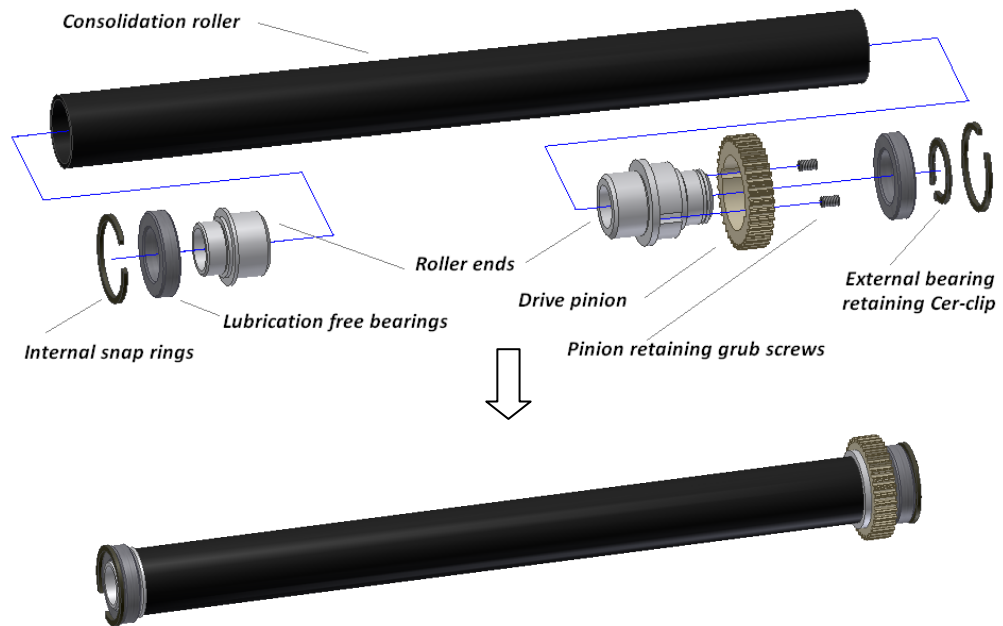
Upper: CAD explosion diagram of the heated roller assembly. Lower: a CAD assembly drawing of the heated roller.
